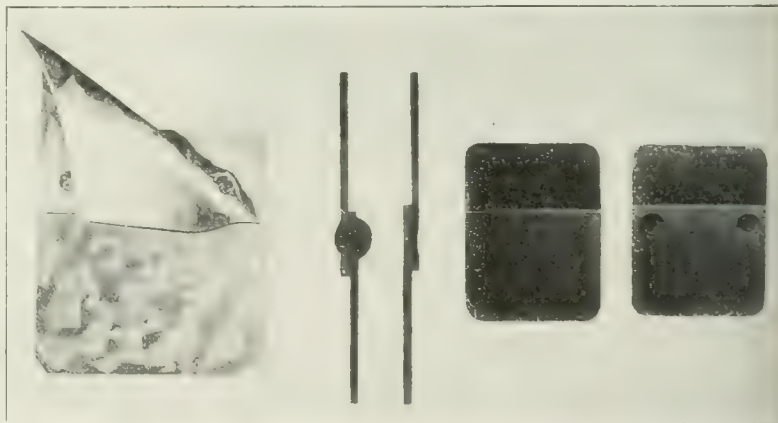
Front and Back of Spot Weld, Welding of Galvanized Sheets.
